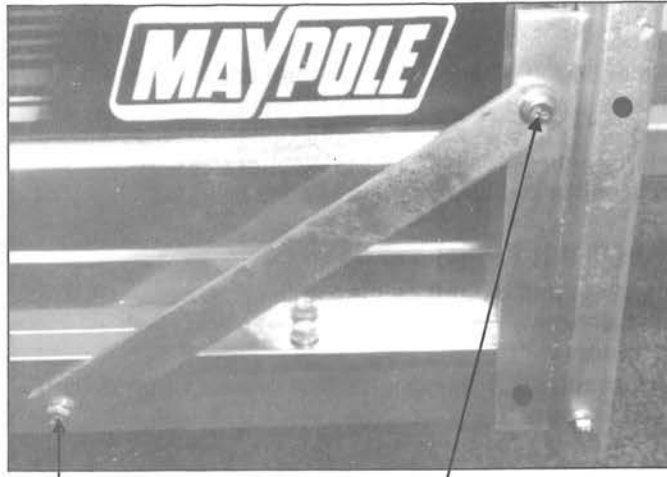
All trailers will require the top of the bracing bar to be secured through the top hole in the plate & the trailer side panel. The bottom of the bracing bar is bolted to the base panel
